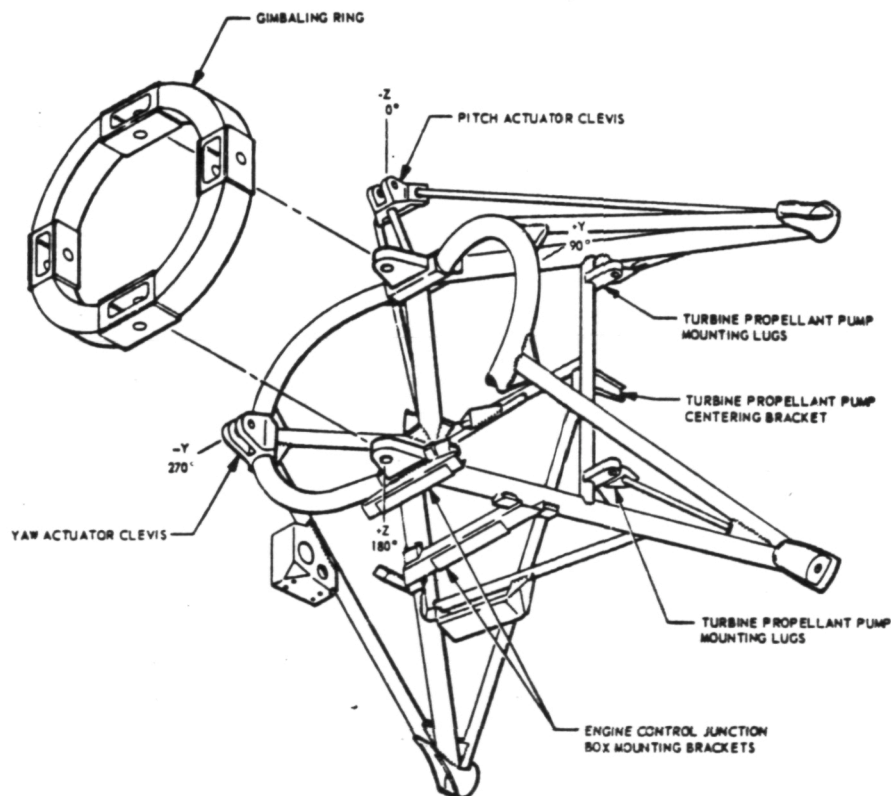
Engine Mount and Gimbal Ring Assembly
